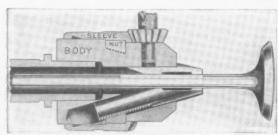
Jaws of Chuck Are Relieved in Center and Grip Valve Stem Where It Fits Valve Guide
